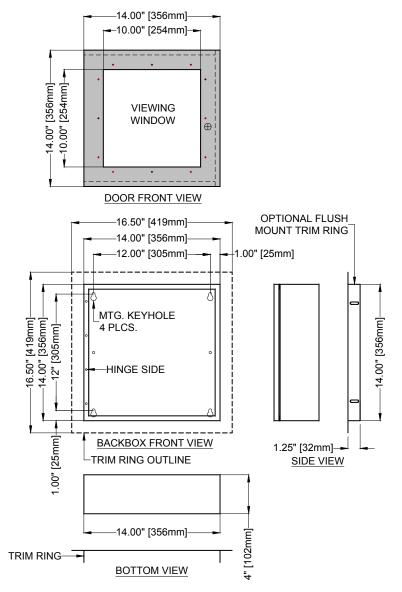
Door Assembly and Back Box Dimensions, P/N 10-2690
